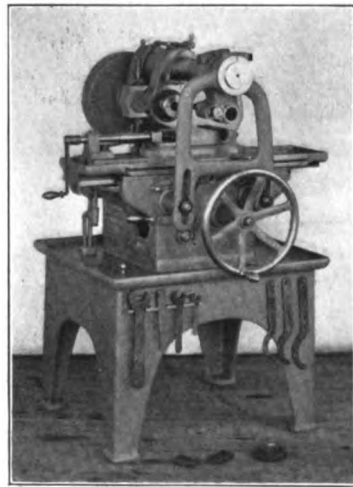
MILLING MACHINE WITH GEARS COMPLETELY ENCASED
